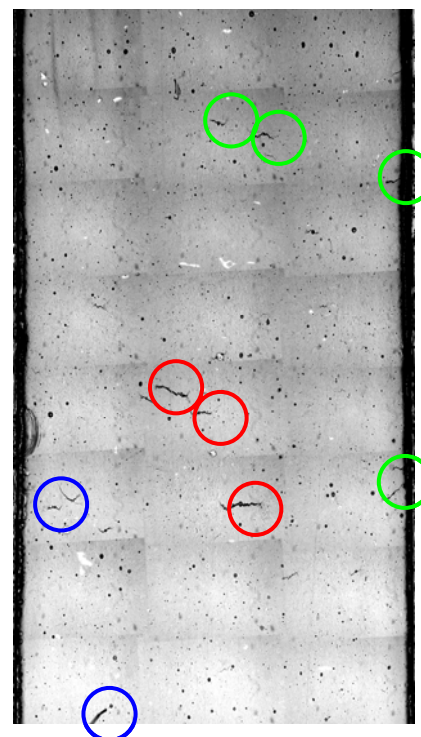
Photo Montage of Specimen Surface Acetate Replicate.
